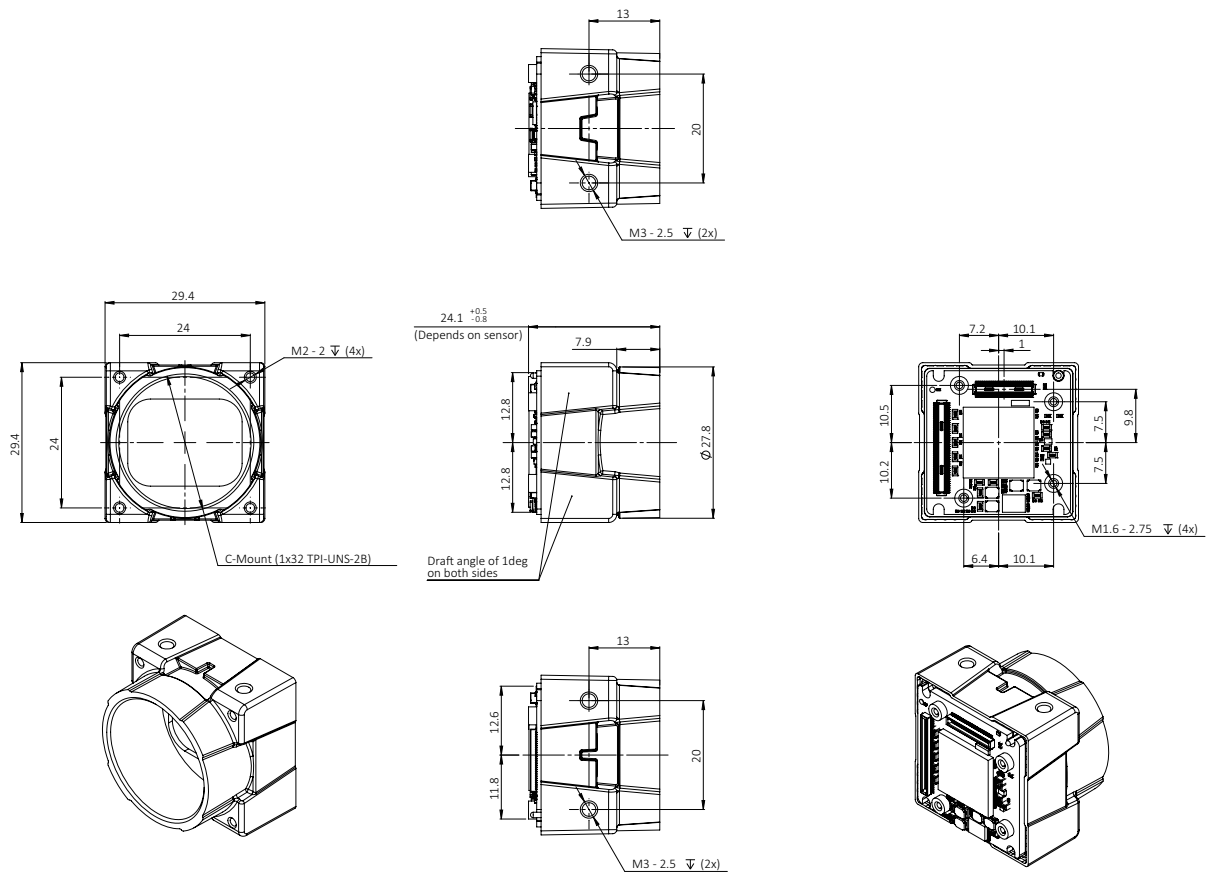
Open Housing C-Mount (Alvium Flex) dimensions
